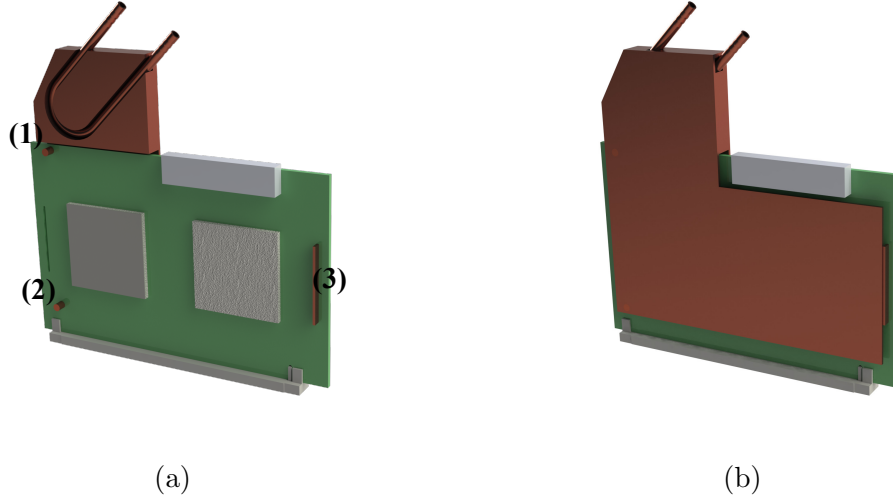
CAD rendering of one front-end card with its cooling components. Panel a) shows the front-end card with partially removed cooling system. One copper plate for heat transfer as well as one heat conducting pad between the copper plate and T2K chips (grey squares) has been removed. (1), (2) and (3) indicate the soldering positions of the copper plate. The front-end card with the complete cooling system attached is depicted in panel b).
